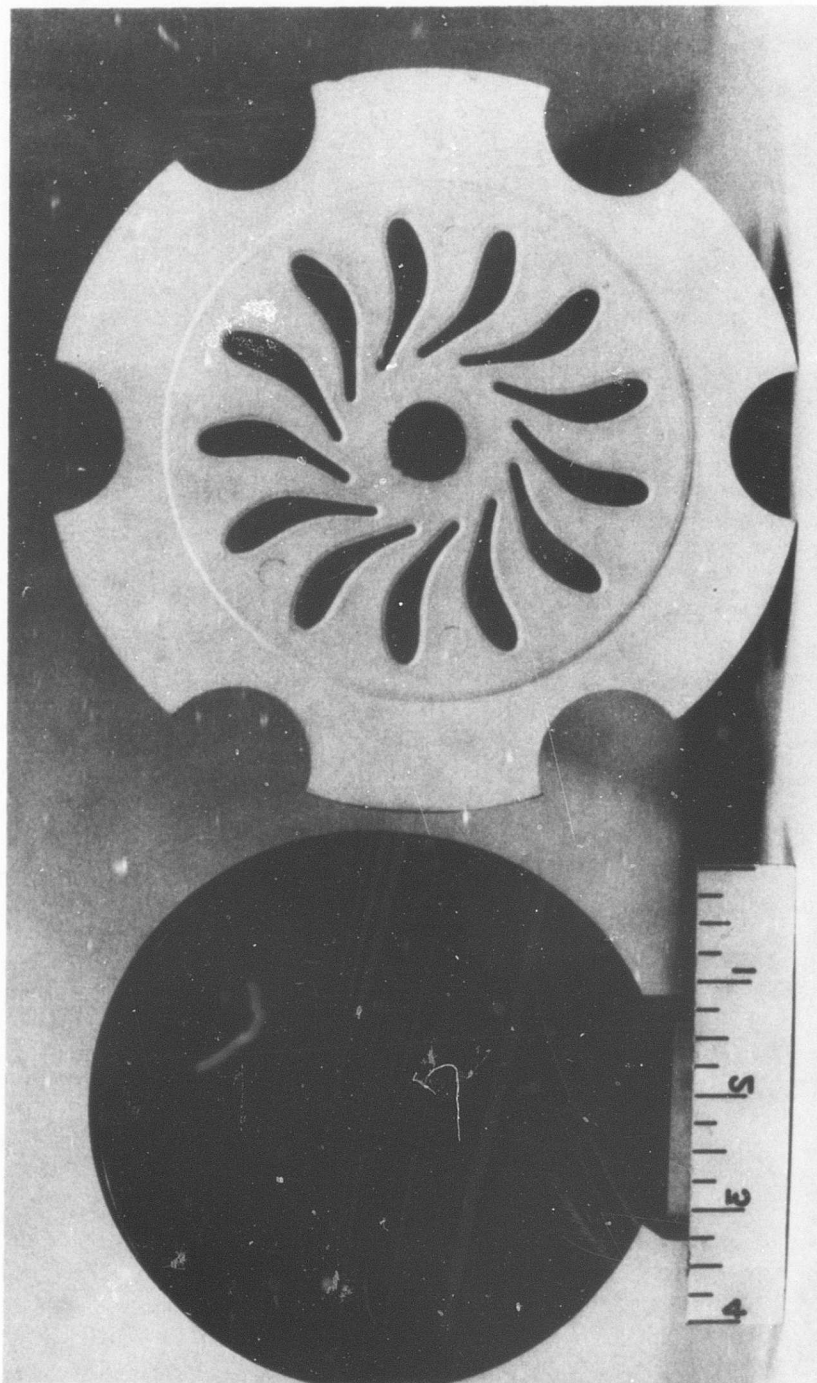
Rotor Disc Cooling Air Impeller Vanes and Ceramic Core.
